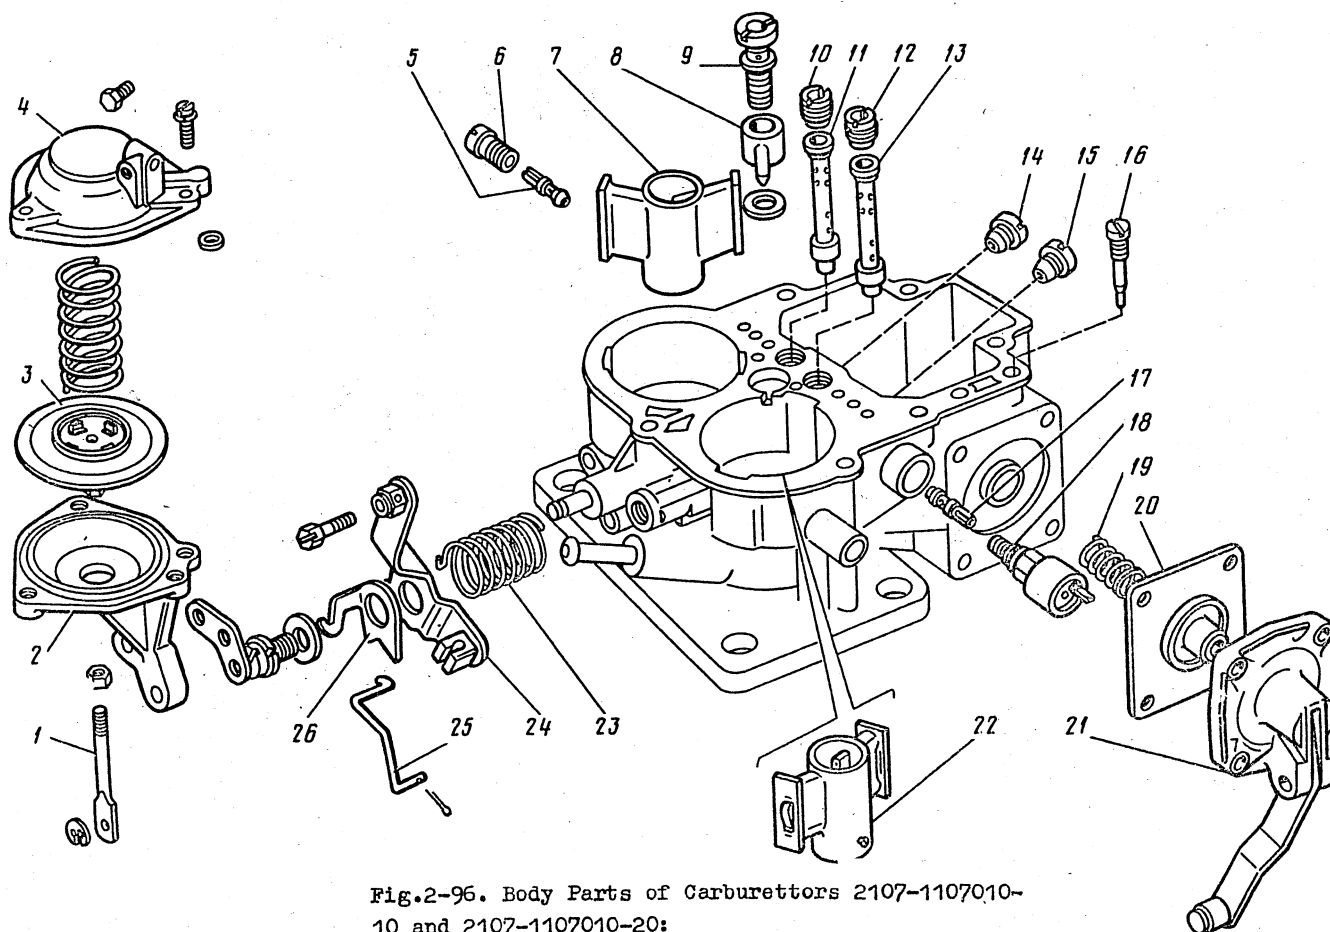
Body Parts of Carburetors 2107-1107010-10 and 2107-1107010-20:
